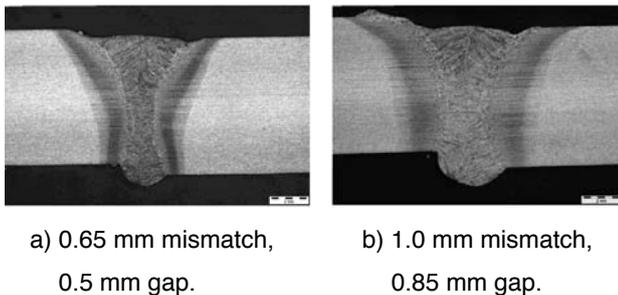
Cross-sections through adaptively controlled hybrid weld made over joint with both mismatch and gap.
